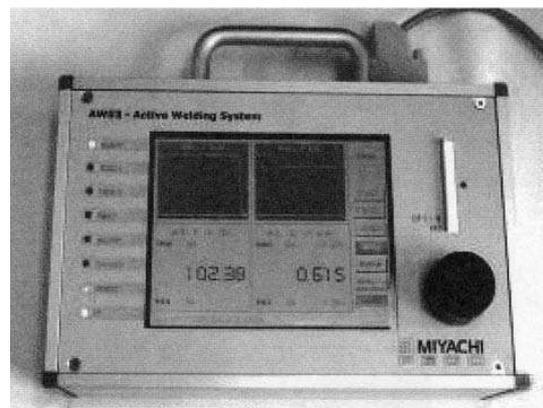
Process control unit (enables all together the setting and judging of checking conditions, the setting of pressurising process and the setting of the conditions for welding power).
